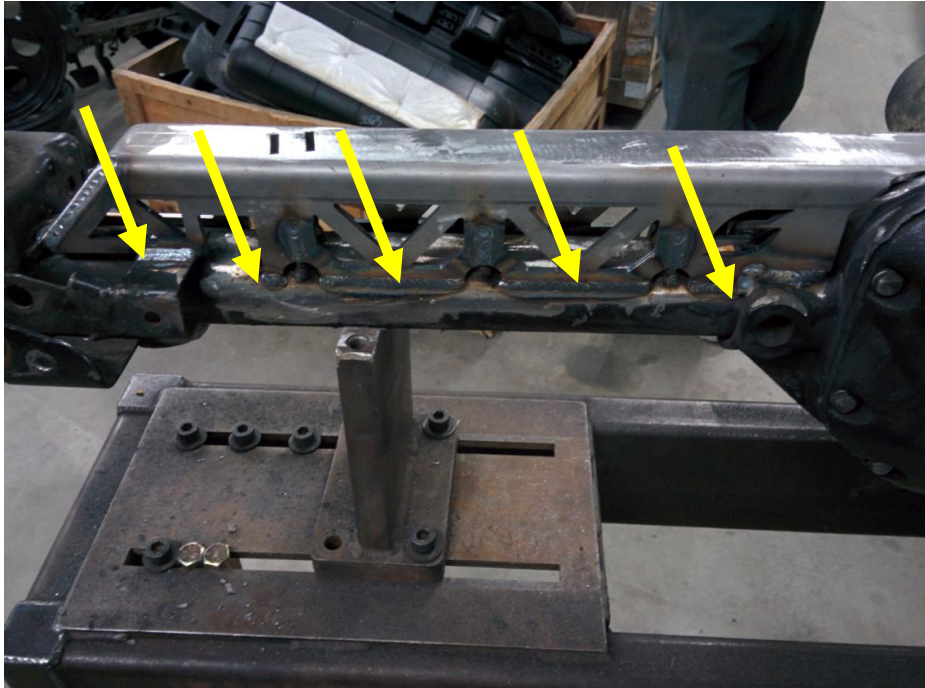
Center Plate Sides Welded to Truss
